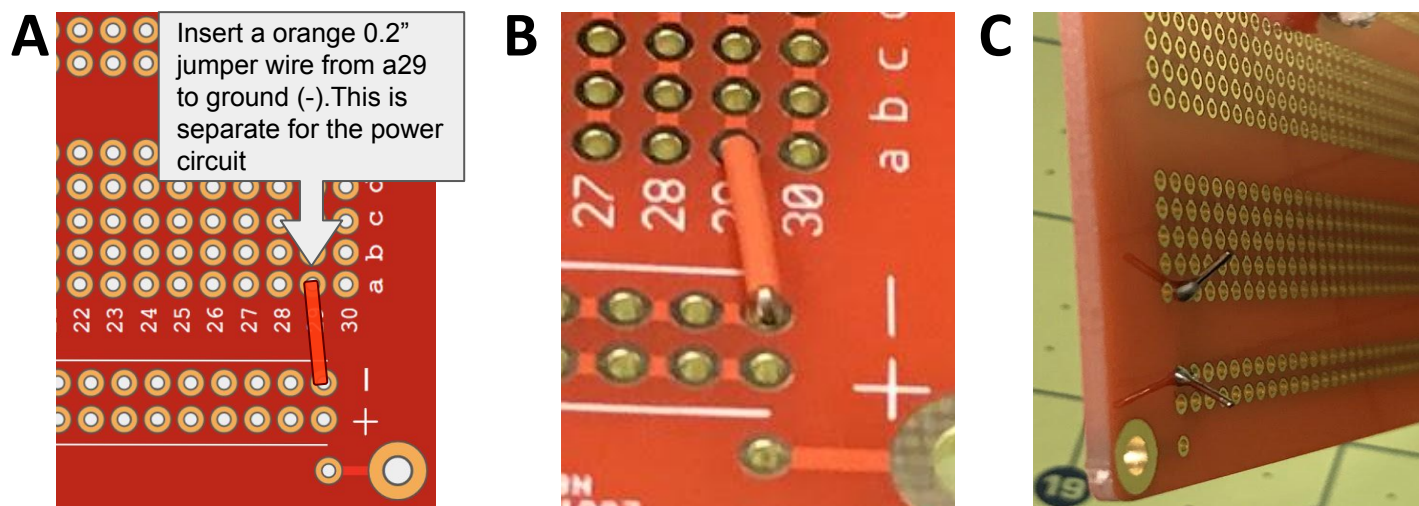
Soldering the jumper for the power supply circuit. (A) Map of the coordinates of the orange jumper for connecting the power supply to ground. (B) The orange jumper soldered in place. (C) The underside view of the jumper soldered in place.
